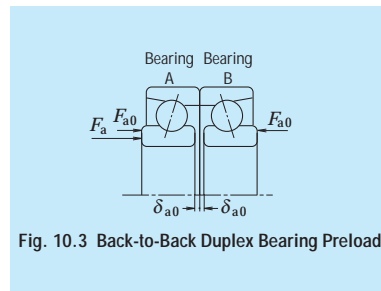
Back-to-Back Duplex Bearing Preload
